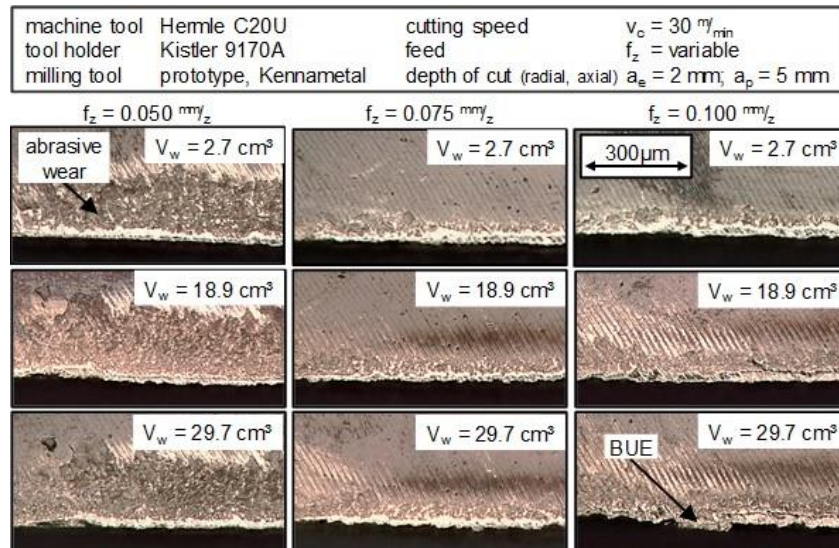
Tool wear at the flank face of the cutting tool determined for constant steps of the material removal V_w
